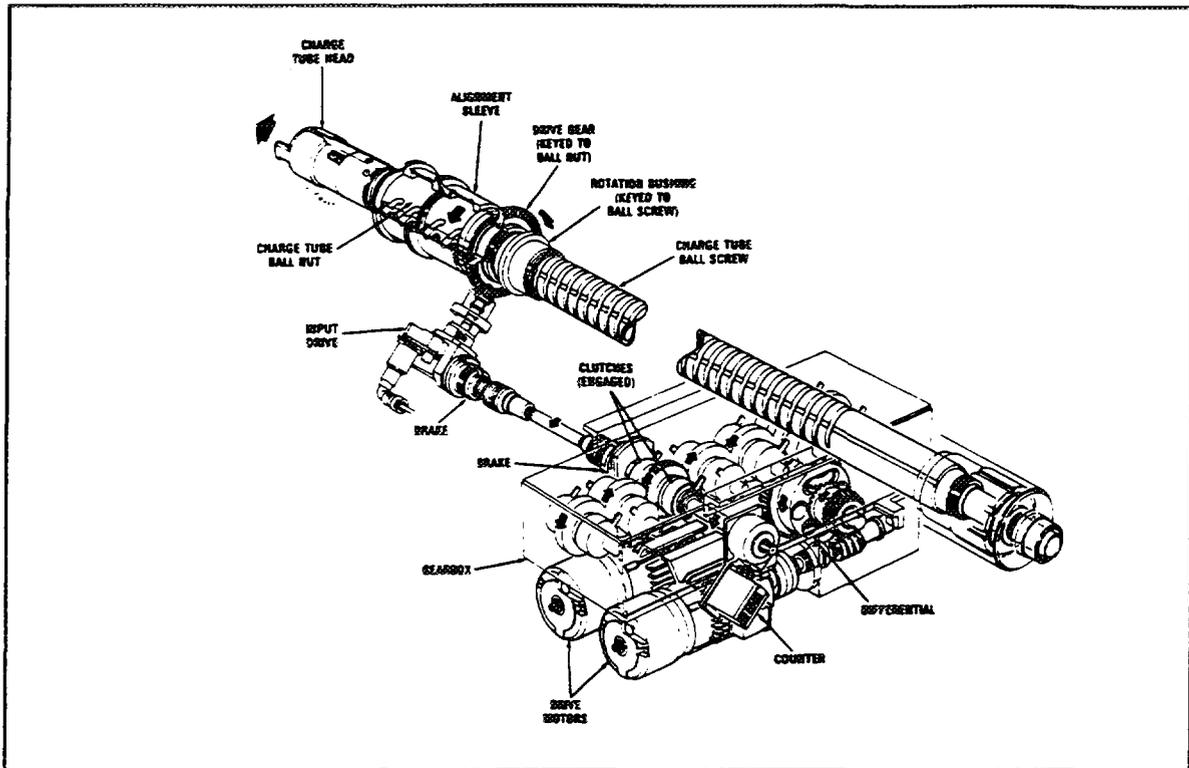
Schematic of Darlington Fuelling Machine Charge Tube Drive Mechanism.
